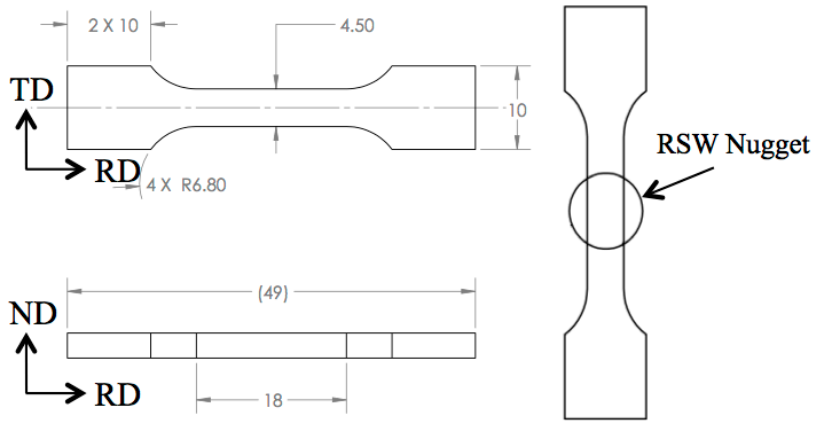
Microtensile specimen geometry and RSW nugget location.
